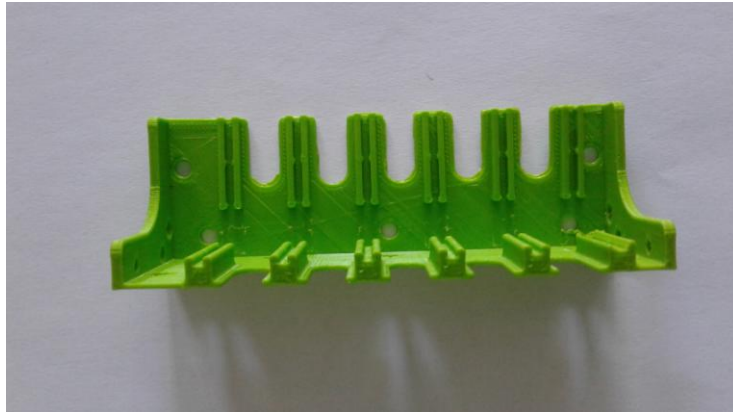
3D printed PLA frame strut with configurable slots for electronic circuit boards
